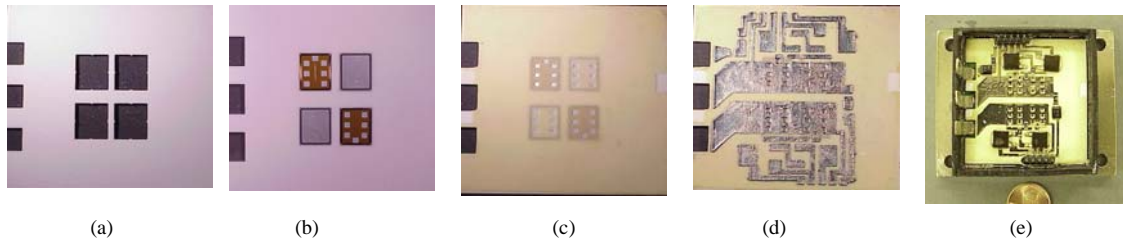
Manufacturing process of test sample (a) laser cut substrate; (b) chip mounting; (c) solder mask screening; (d) electroplated copper with designed patterns; (e) final sample with encapsulation;
